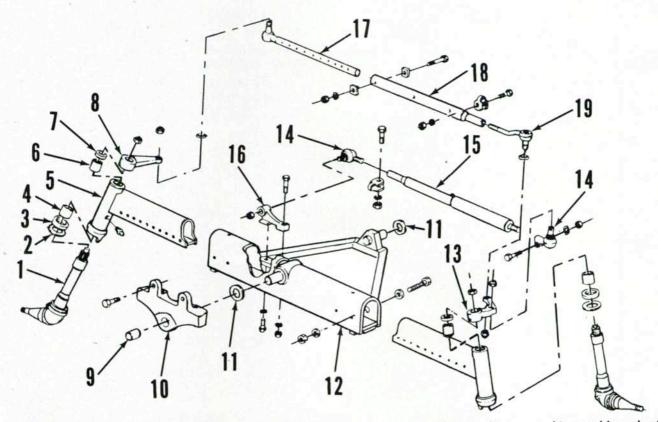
Exploded view of adjustable front axle assembly. The center member (12) may be reversed to provide a shorter wheelbase on some models.
